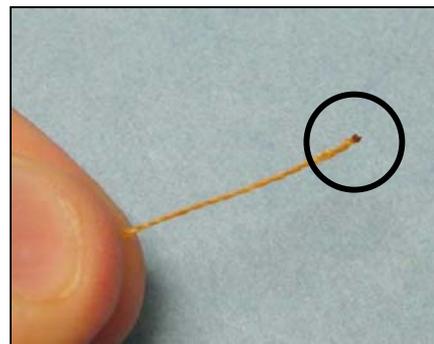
Thread Breakage Due to Needle Heat (Note Nodule on End of Thread)
